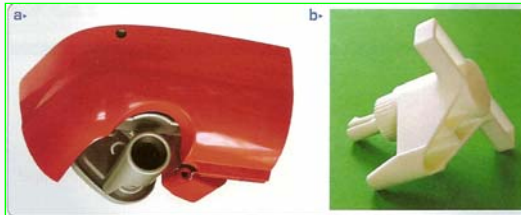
| Laser sintering and cars. a. Close-up of the laser-sintered prototype bumper section for the Jaguar XJ. The painted model was used to visualize the fit and finish of key components before production. b. The laser-sintered plastic tool that assists operators working on the new Jaguar XK production line to position window lift mechanisms during assembly.
